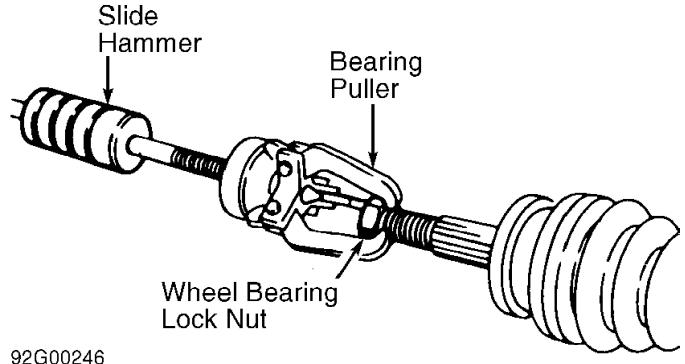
Removing Outer CV Joint Courtesy of Nissan Motor Co., U.S.A.
